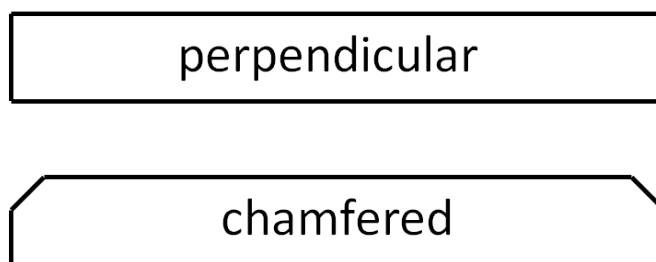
Representation of a cross-section of the filter cassettes to show the perpendicular and chamfered corner designs.
